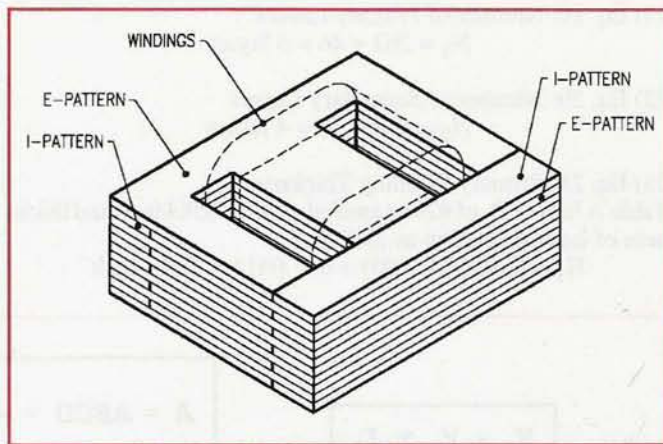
Transformer core stack assembly, using the "E" and "I" shaped metal pieces cut from the blanks shown in figure 1.
